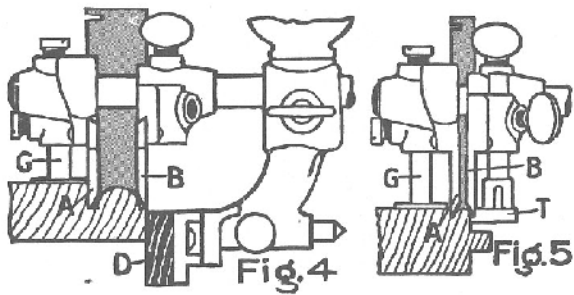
BEADING—For ordinary Beading place Sliding Section (B) so that the outside of same is in line with left side of the cutter. Fence (D) gauges the distance of bead from edge of board, and Gauge (G) depth of cut. Spurs not used.
